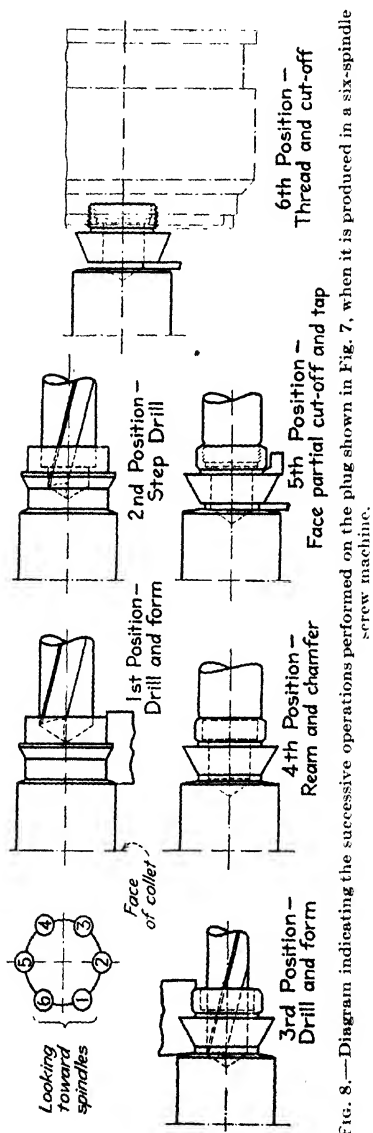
Diagram indicating the successive operations performed on the plug shown in Fig. 7, when it is produced in a six-spindle screw machine.
